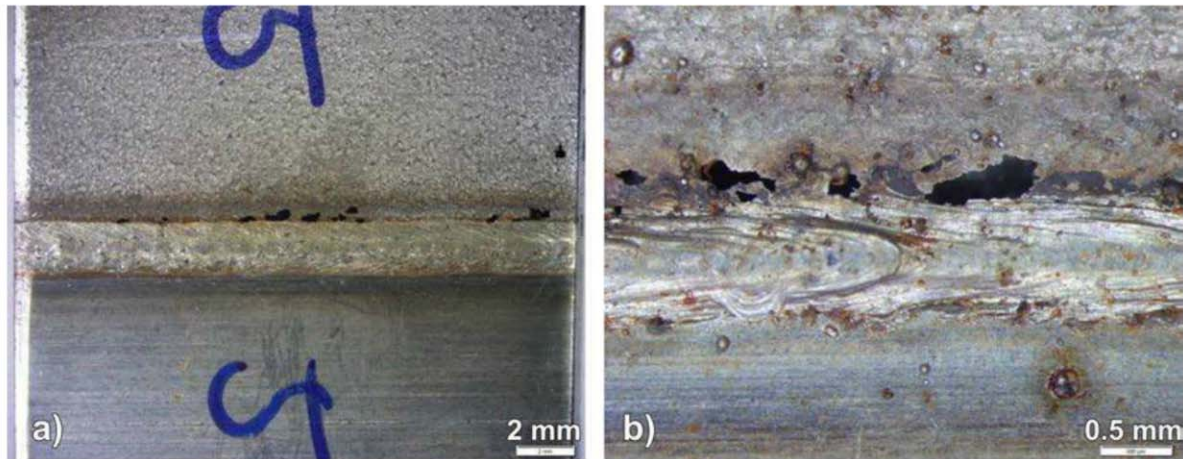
Pitting corrosion of the laser welded joint on the side of lean duplex steel on the face side (a) and on the back side (b)
